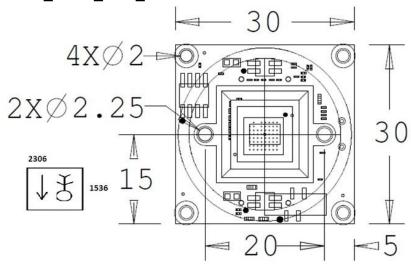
Front Portion of See3CAM_CU30_CHL_TC Module Board mechanical dimensions – the image will be upside down when the board is placed as shown above
